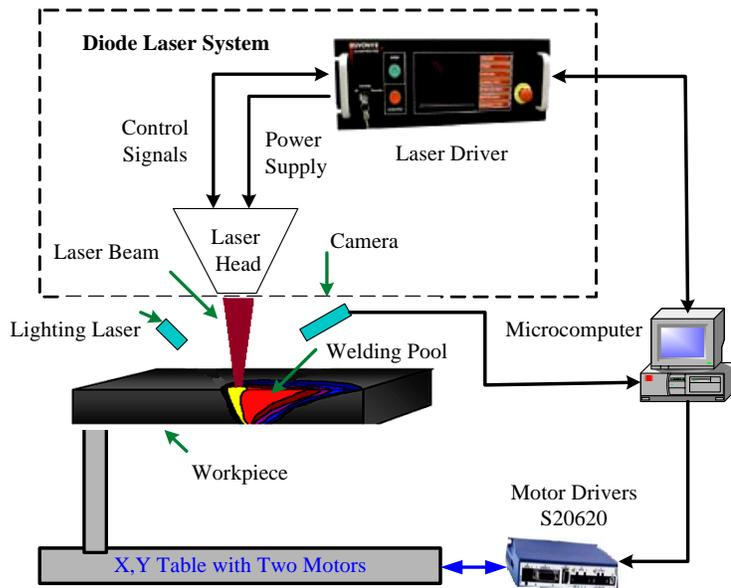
, Welding fixture and hardware of control system [25]
